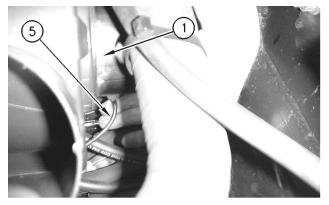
009091193. Disconnect hose (5) from air cleaner assembly (1).
